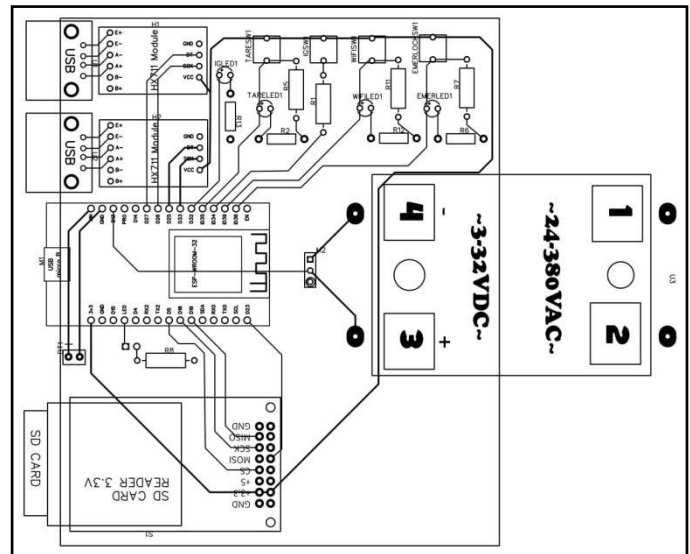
PCB Layout - Data Acquisition (DAQ) system
